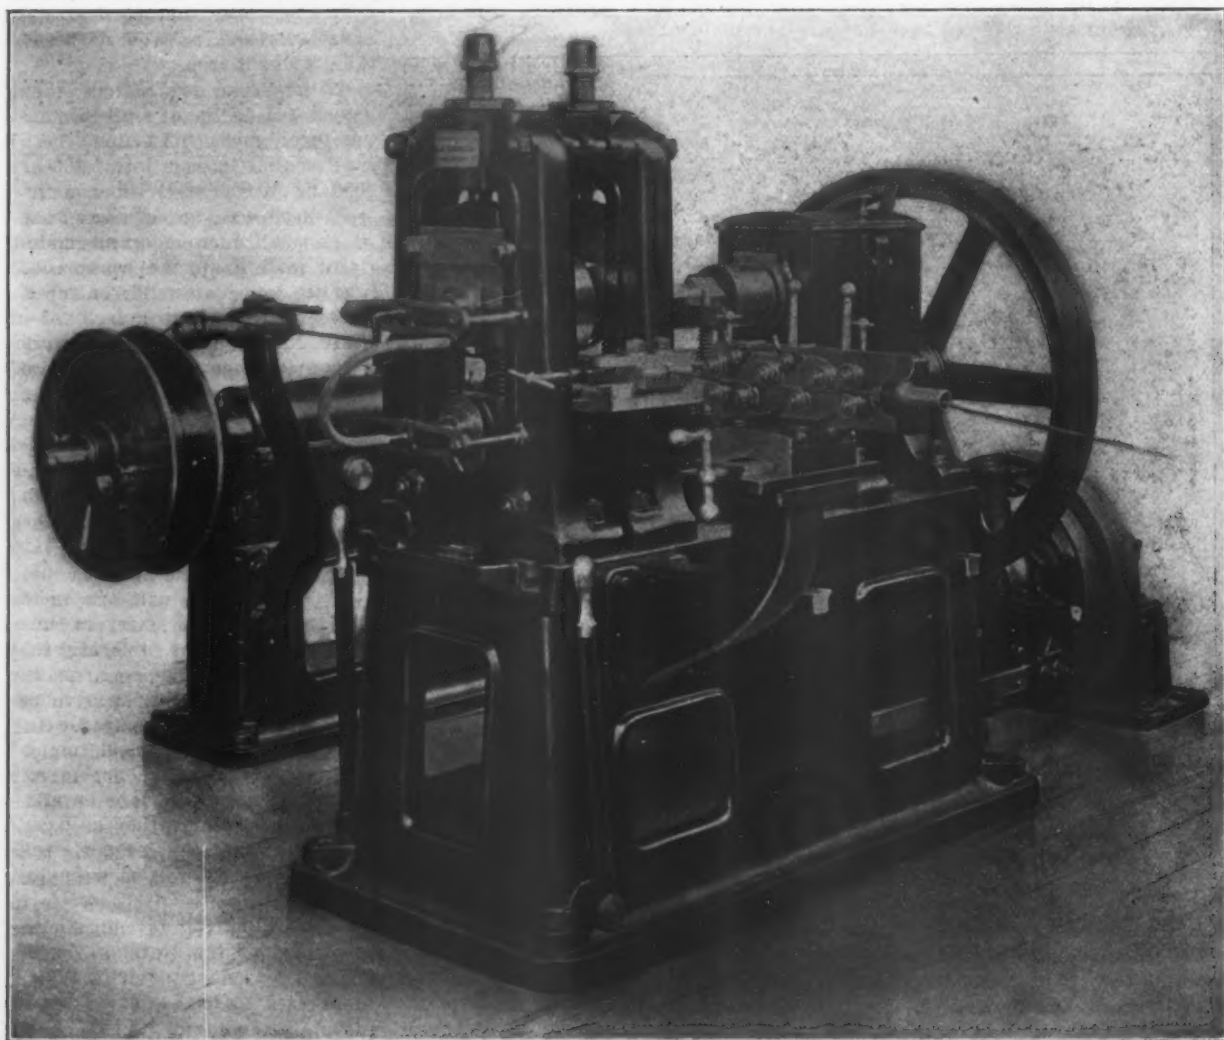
The Wire Flattening Mill Made by the Walzmaschinenfabrik August Schmitz, Duesseldorf, Germany.
